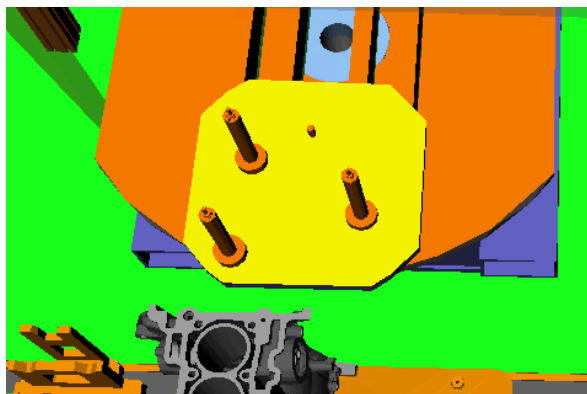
The engine resting pins on sliding plate for three-cylinder engine block
